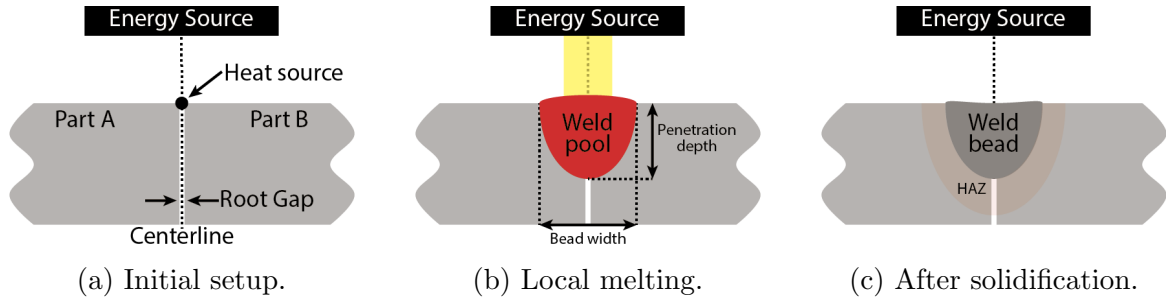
Principle sketch of a fusion welding process.
